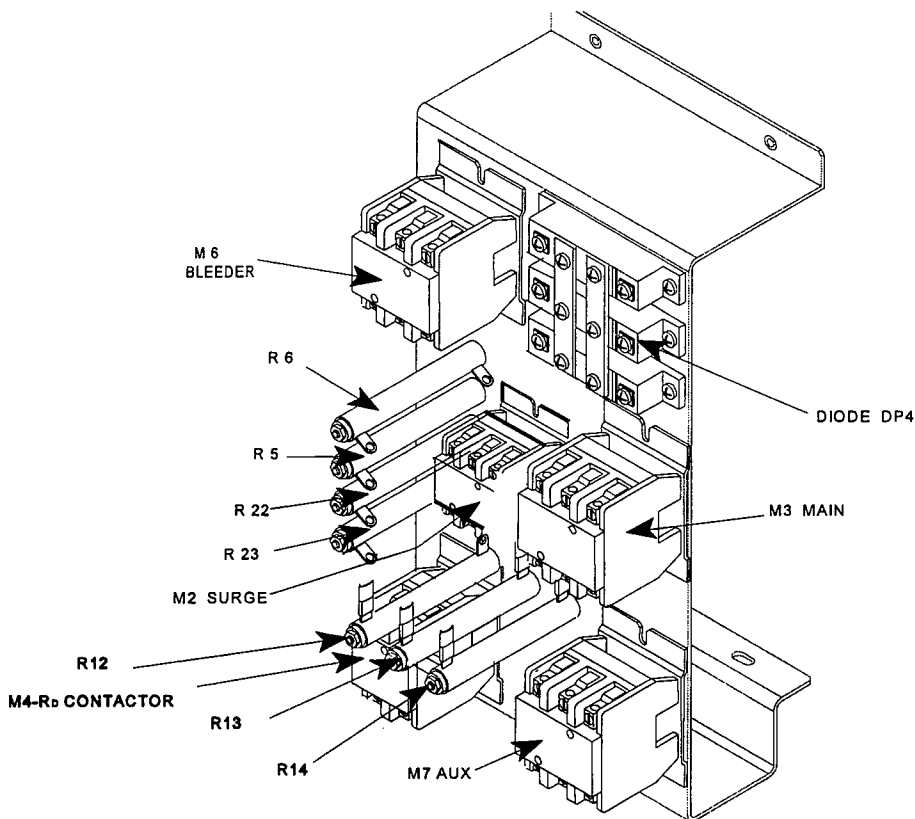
EXISTING POWER SUPPLY PANEL ASSEMBLY
